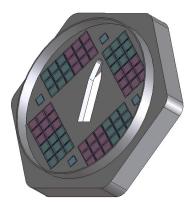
A front view of the cold plate showing CCD and HgCdTe sensors mounted.
